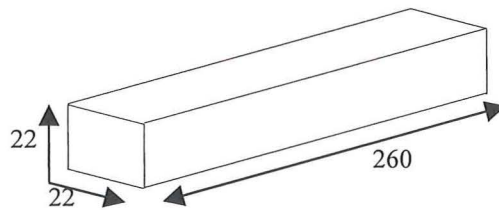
Test specimen dimensioned. The dimensions of the test specimen are 260x22x22mm.
